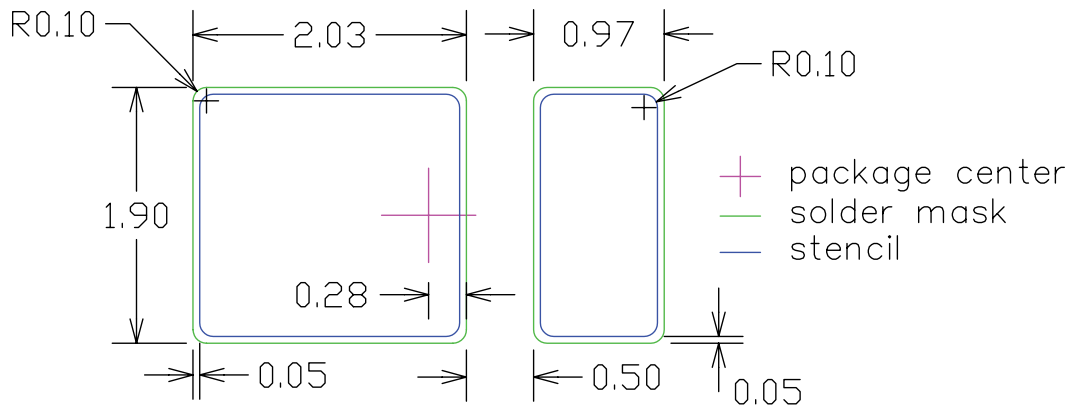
Recommended PCB solder pad layout for LUXEON 2835 Architectural.
